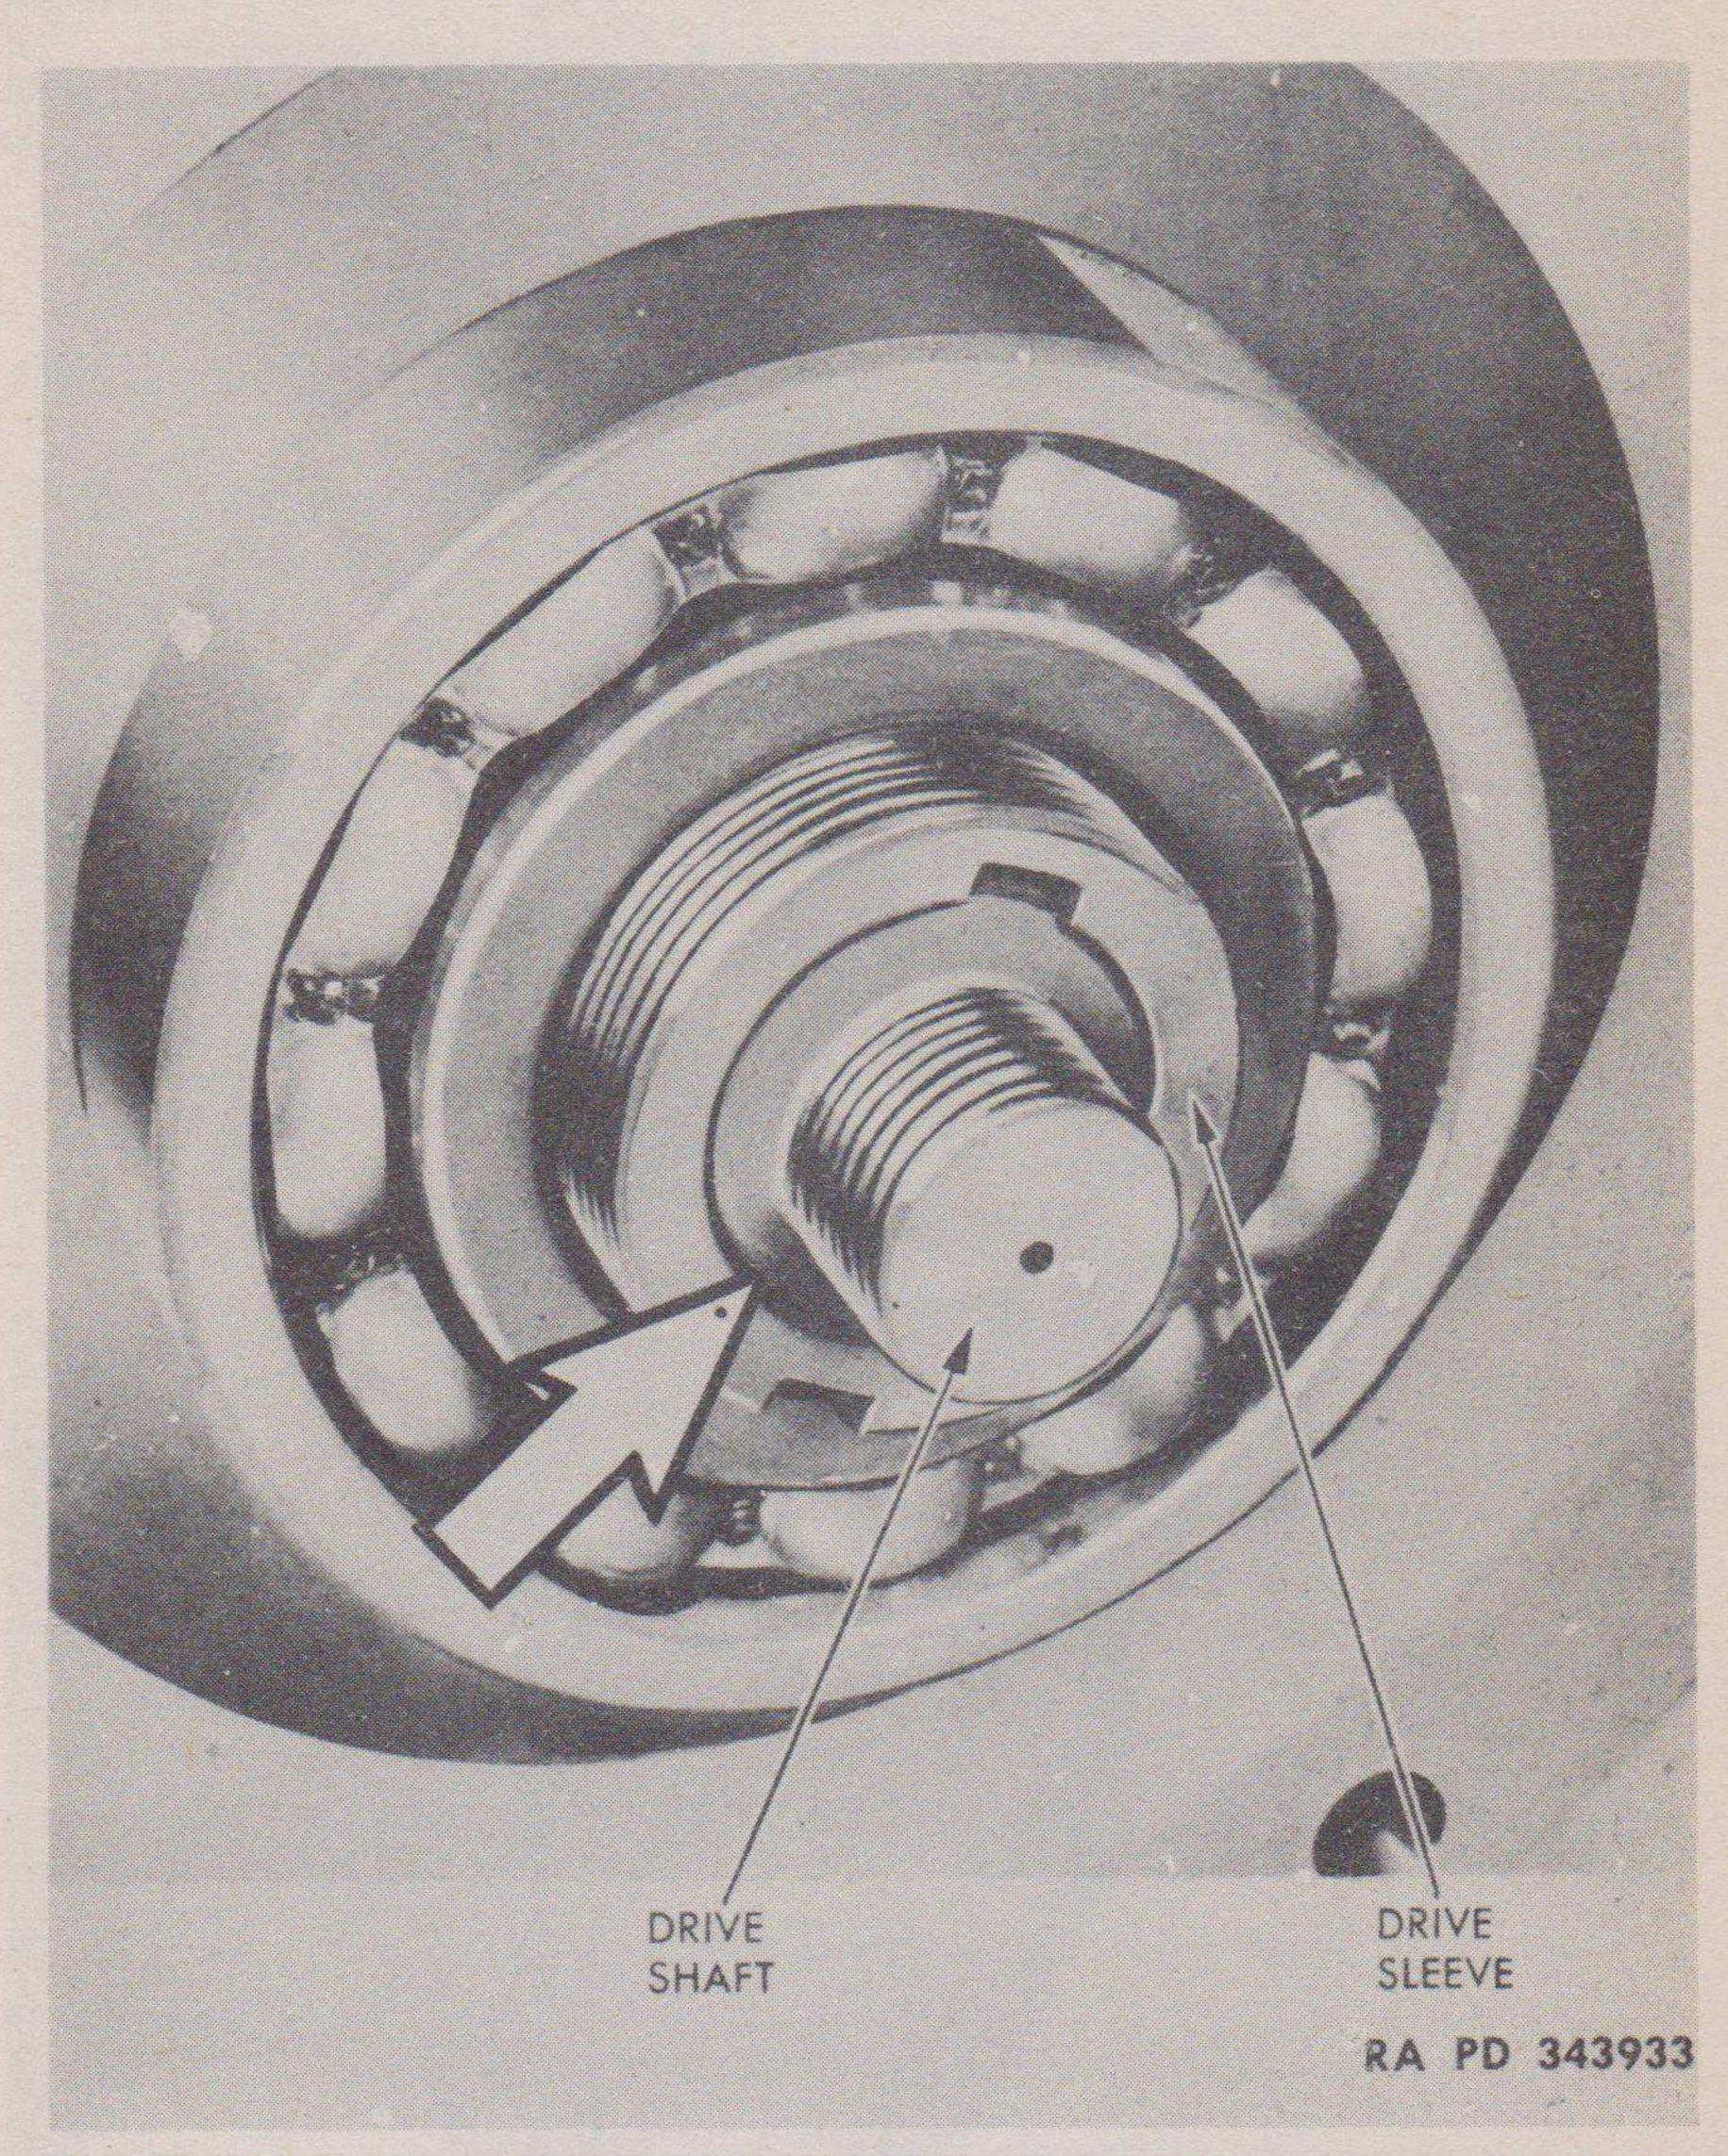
Extension of Clutch Drive Shaft Beyond Clutch Drive Sleeve
